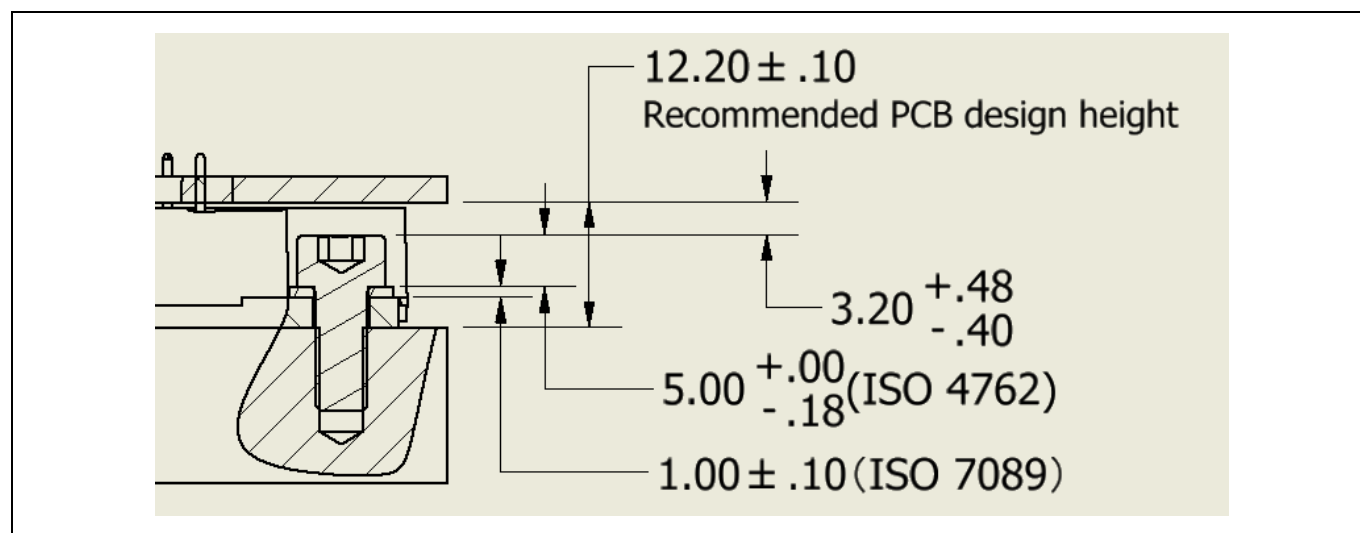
The clearance distance between the clip and the PCB in the EasyHD3 package
